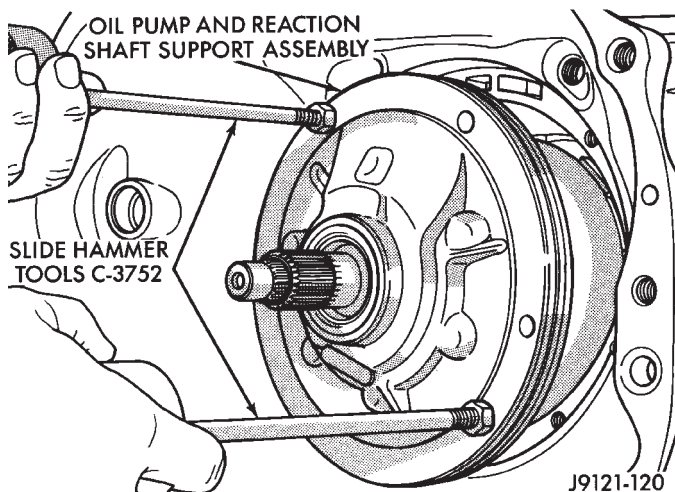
Removing Oil Pump And Reaction Shaft Support Assembly
